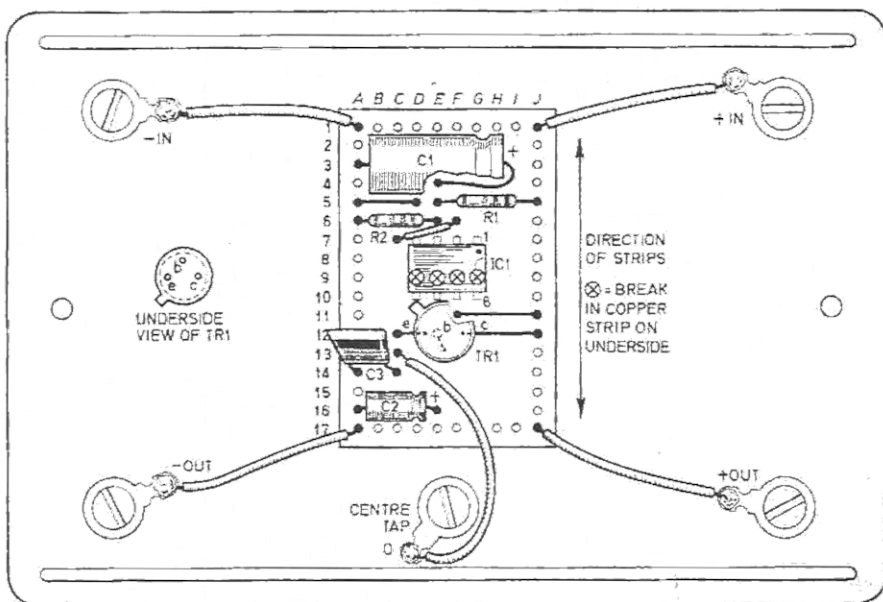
The completed stripboard assembly mounted inside the plastics box.
